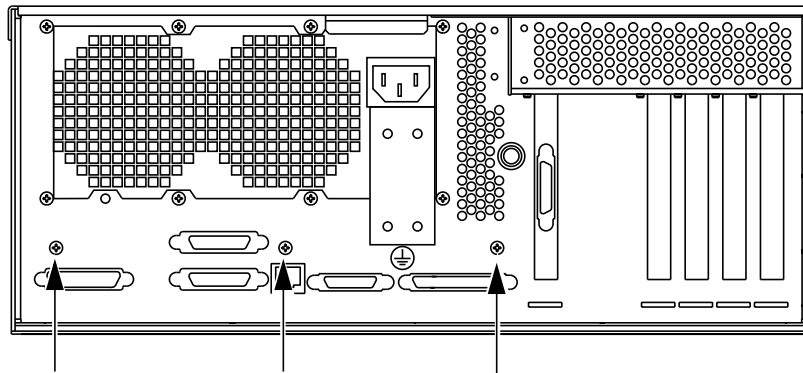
Removing and Replacing the Motherboard (#1)
